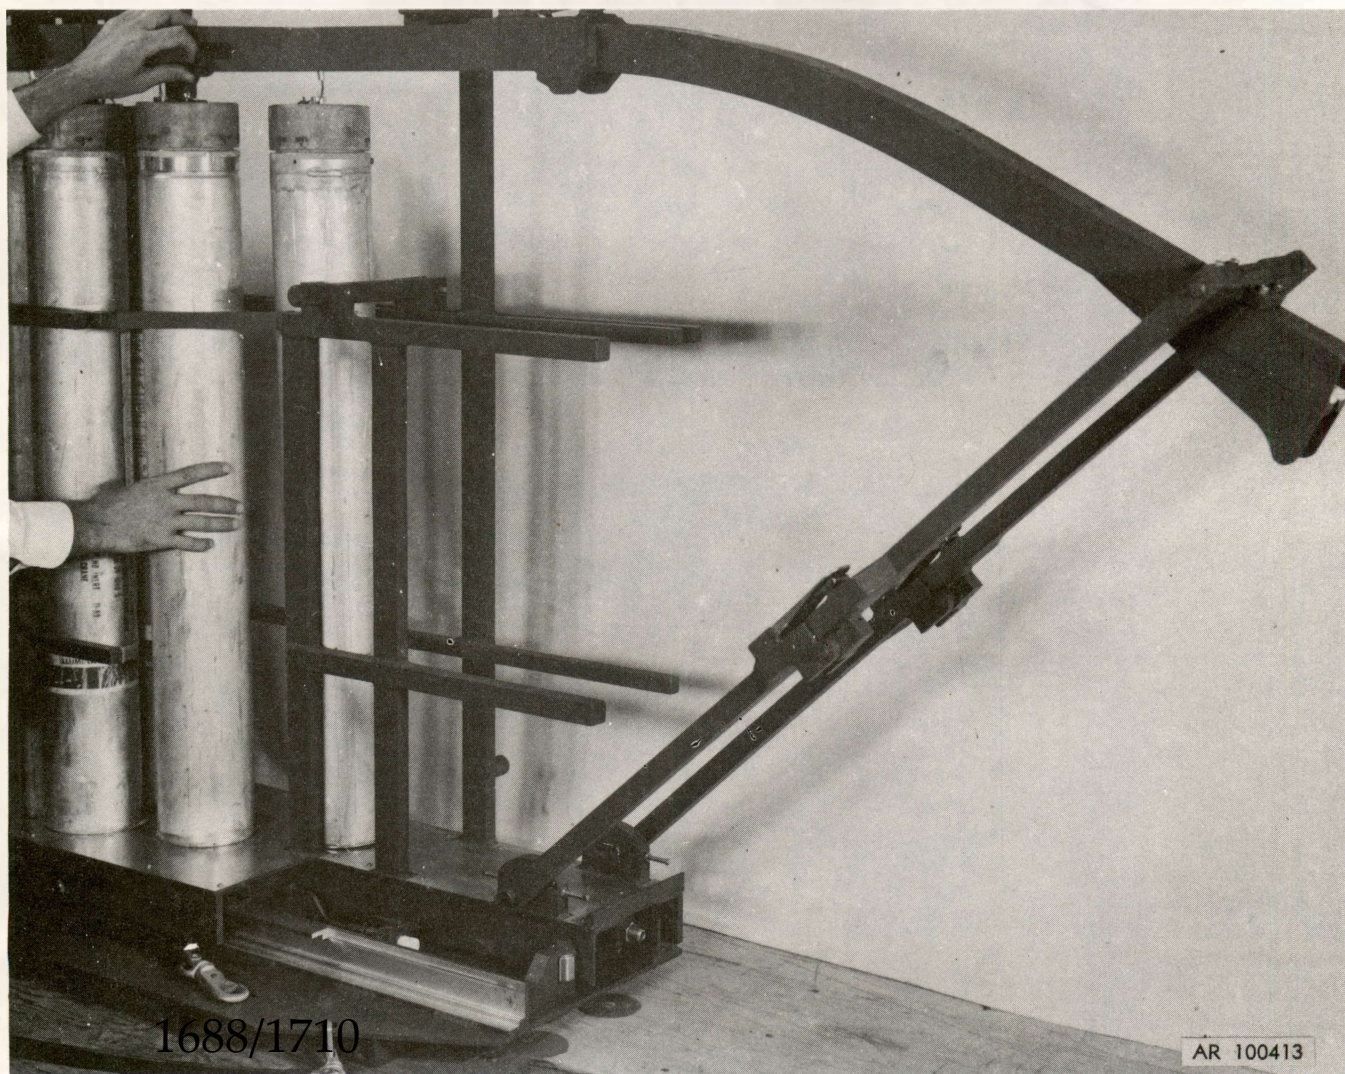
Disengaging pull cable assembly from dispenser assembly.
